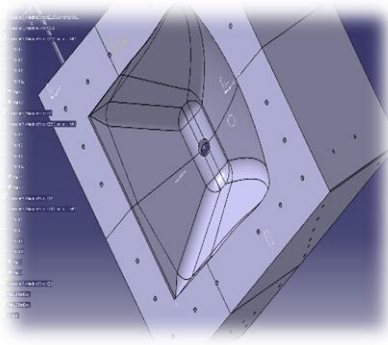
Female mould with a hole inside planned for the resin exes.
